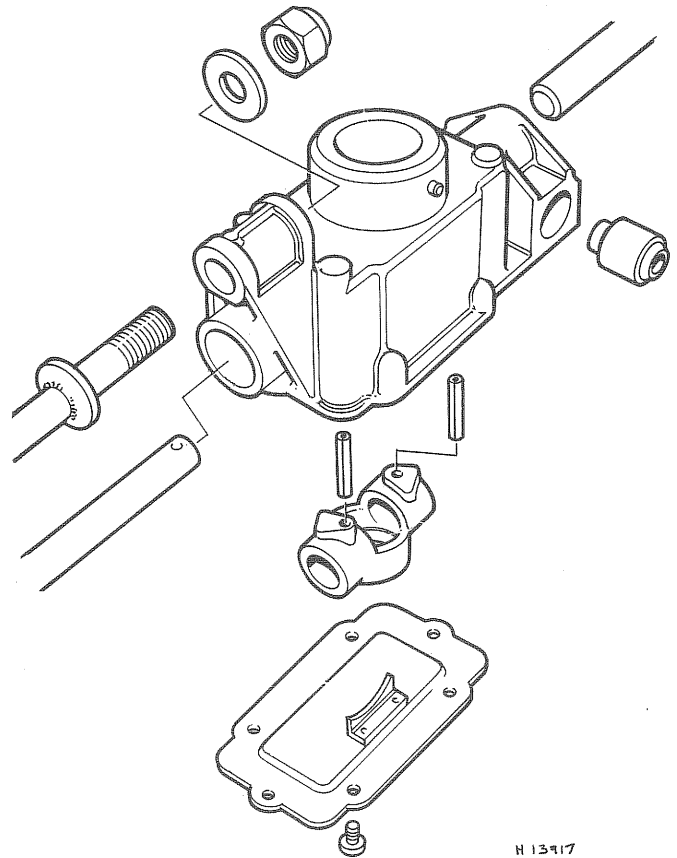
Component parts of the rod-change type remote control housing (Sec 15)
